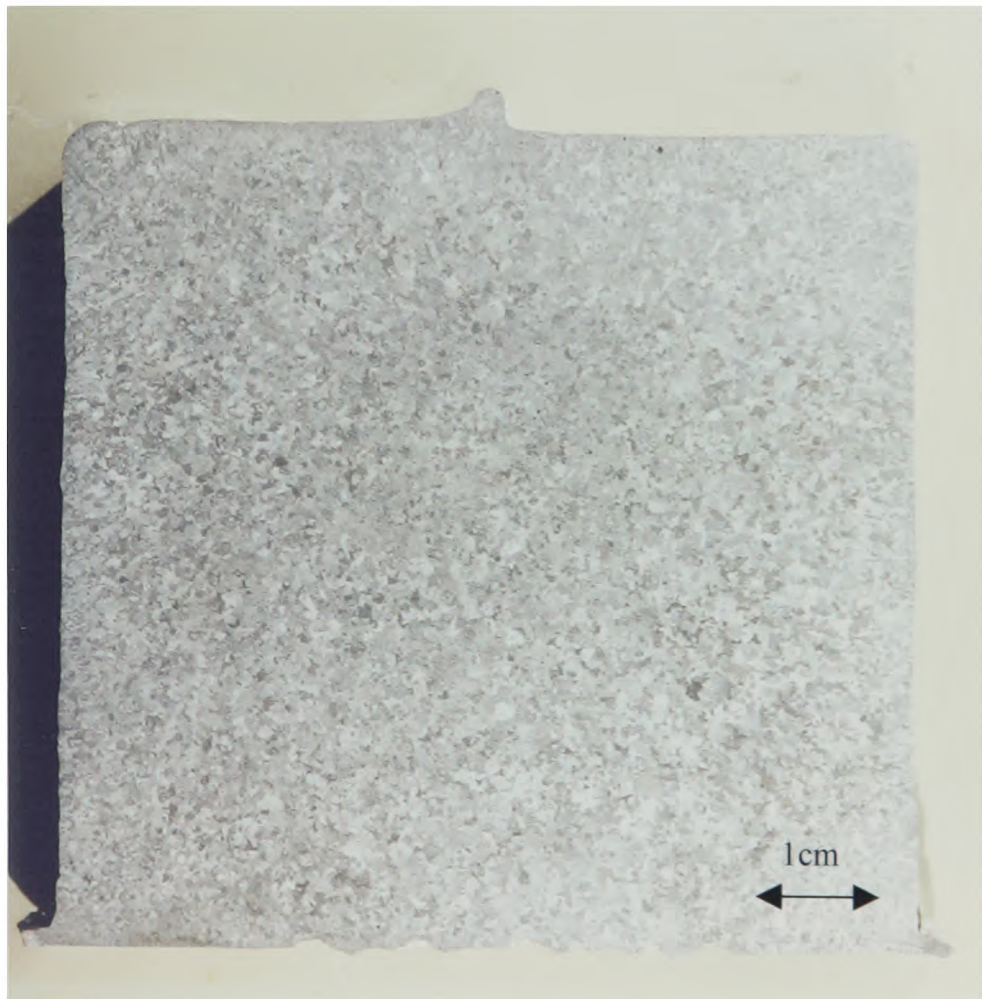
Macrostructure of Al-10wt.%Cu casting, 100°C superheat
